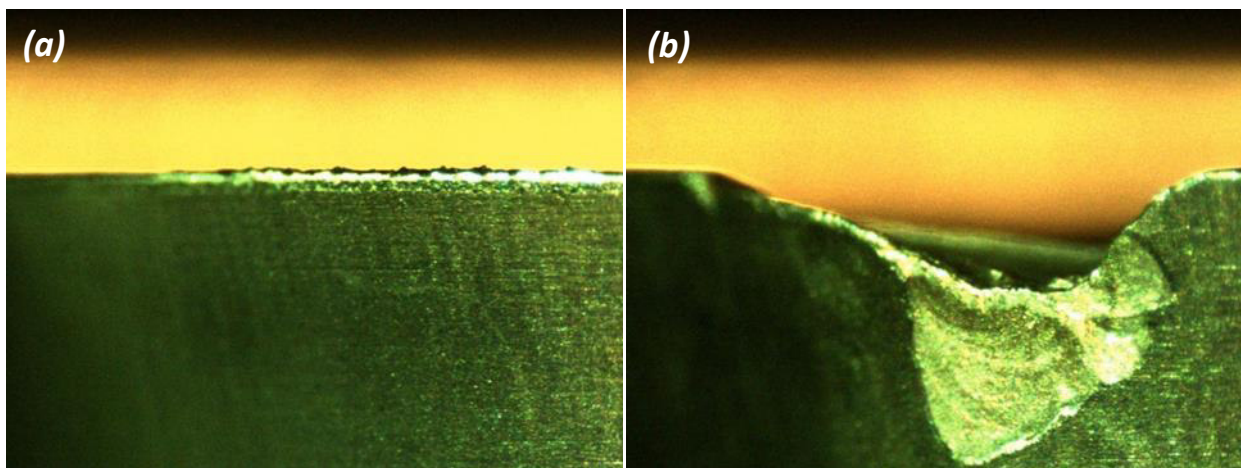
Tool wear at $v_c = 140 \text{ m/min}$ during TEST-4: (a) after 300 mm; (b) Notch after 900 mm.
